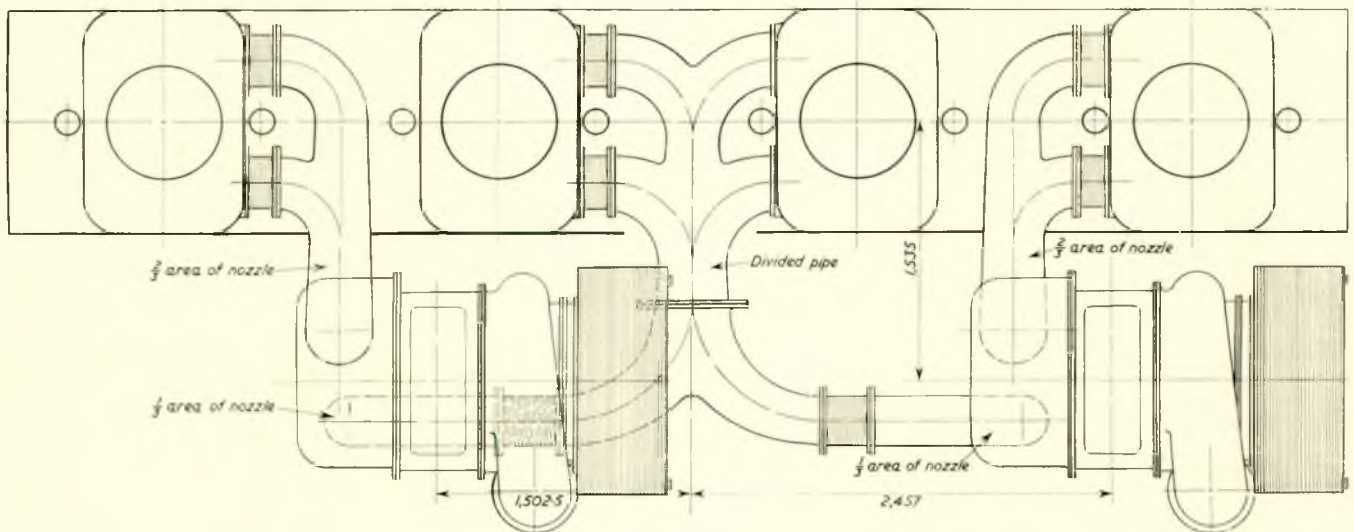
Arrangement of the four cylinder engine with two turboblowers
